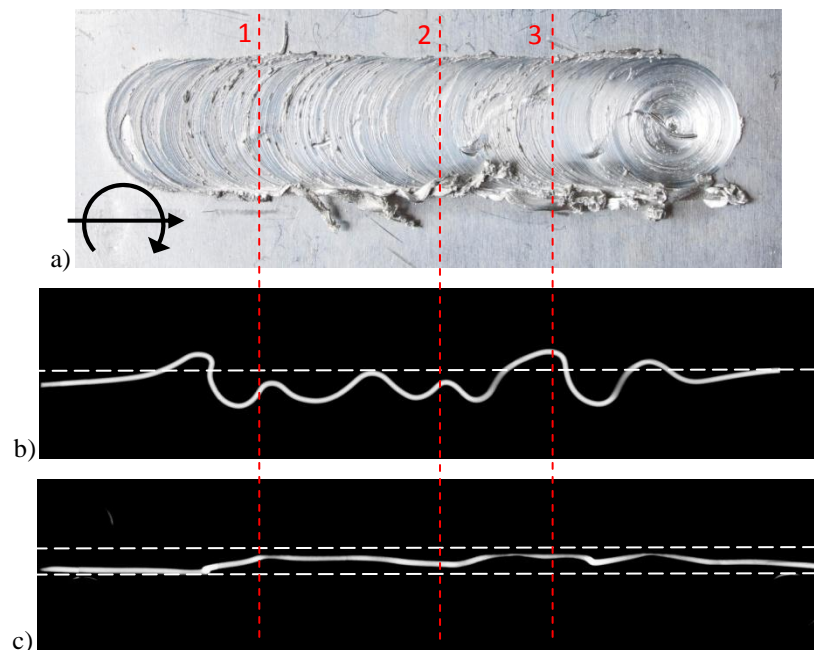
Ribbon wave shape, a) surface wave features, b) top view of the weld bead in X-ray radiography, c) longitudinal view of the volume weld in X-ray radiography.
